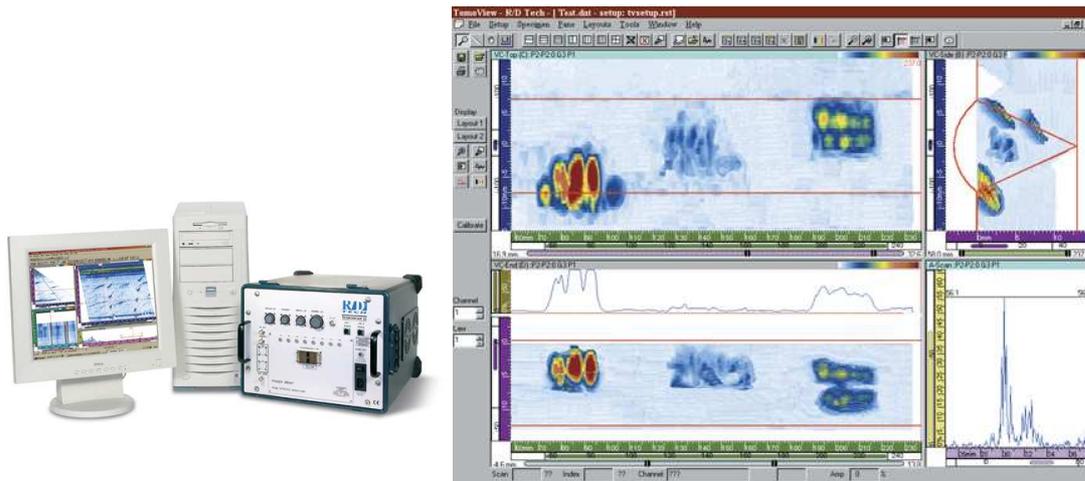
(left): Tomoscan III system. Figure 19 (right): “Top, side, end” view with weld overlay.
